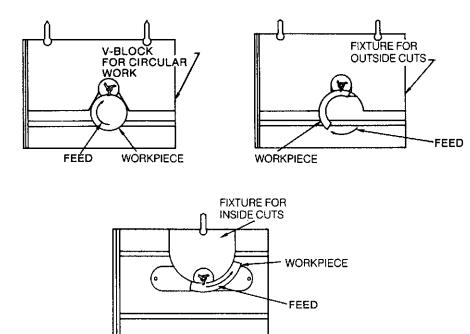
Here are examples of special fixtures you can make when you have many similar workpieces to produce. Fixtures must be designed to suit the work you are doing. The position of the fixture determines how far the cutter penetrates the workpiece. The fixture control area must match the curve in the workpiece. Be sure the contact areas are sanded smooth.
